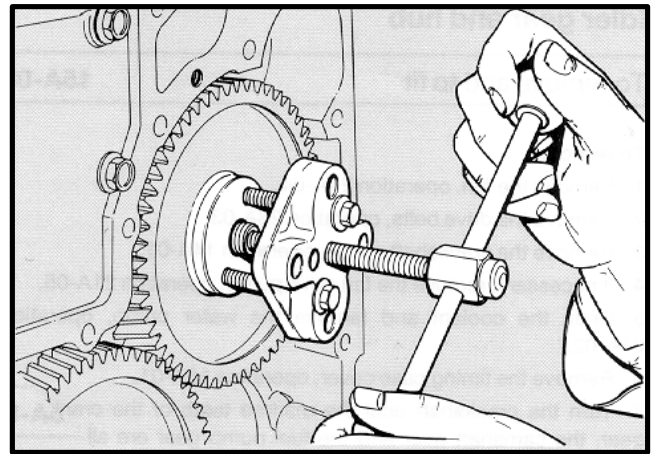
REMOVE THE CAMSHAFT GEAR
